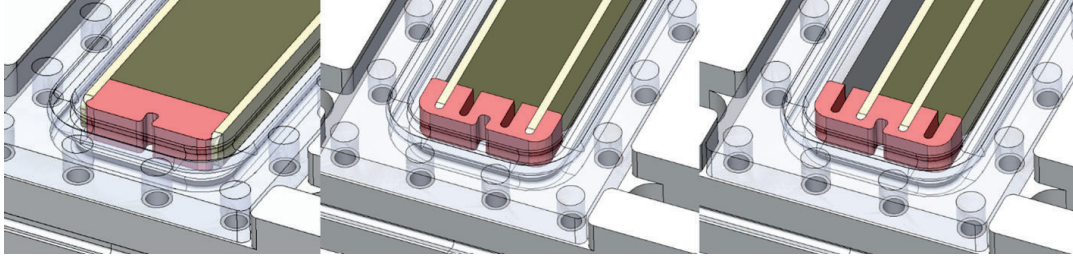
Three different outlet wall positions are shown to demonstrate how the effective outlet width can be adjusted by repositioning the outlet walls using a plastic wall holder insert. This insert allows for testing different outlet geometries without requiring a different machined chamber for each geometry. The first insert in the left image is only used for the widest wall positioning, while the insert in the middle and right images has multiple slots for different outlet wall positions.
